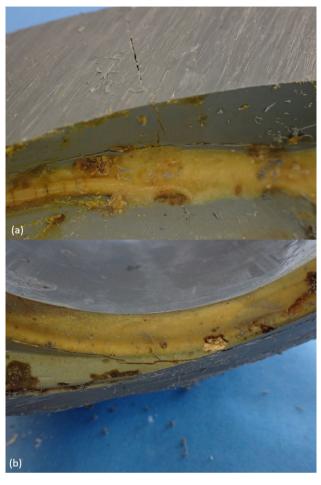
Inner surface of the assembly showing crack visible on (a) both sides of the elbow and along the cement weld and (b) the internal side of the assembly along the cement weld
